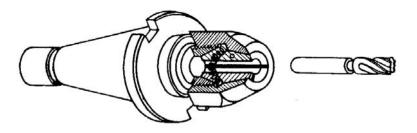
Mounting of straight shank end milling cutters in spindle by collet.
